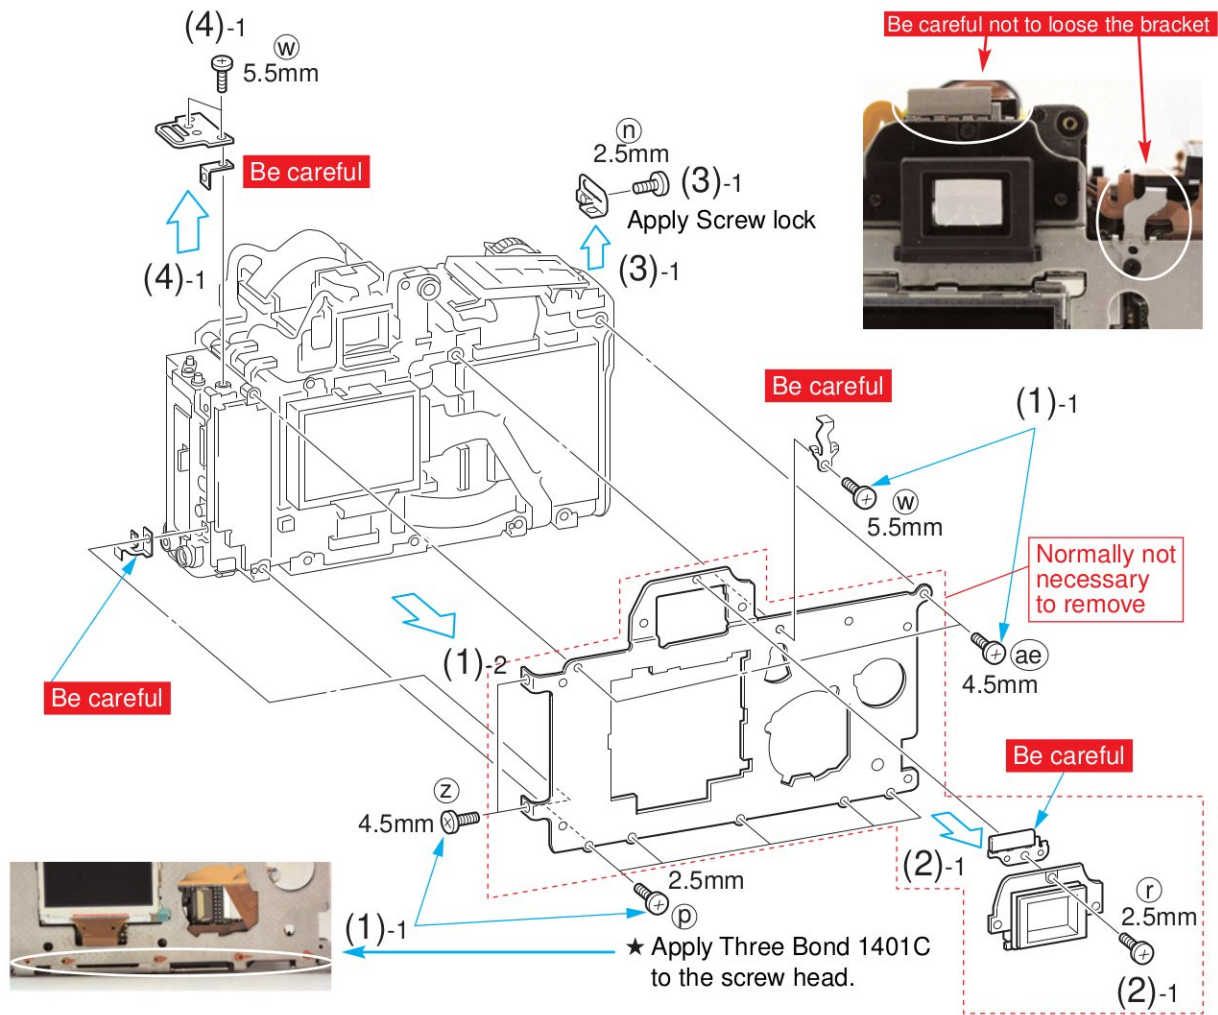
Rear frame, eyepiece cover and strap holder
